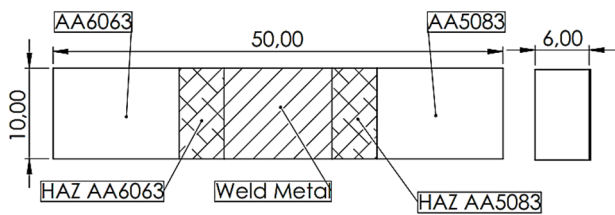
The dimensions of the macrostructure, microstructure, and hardness test specimens
